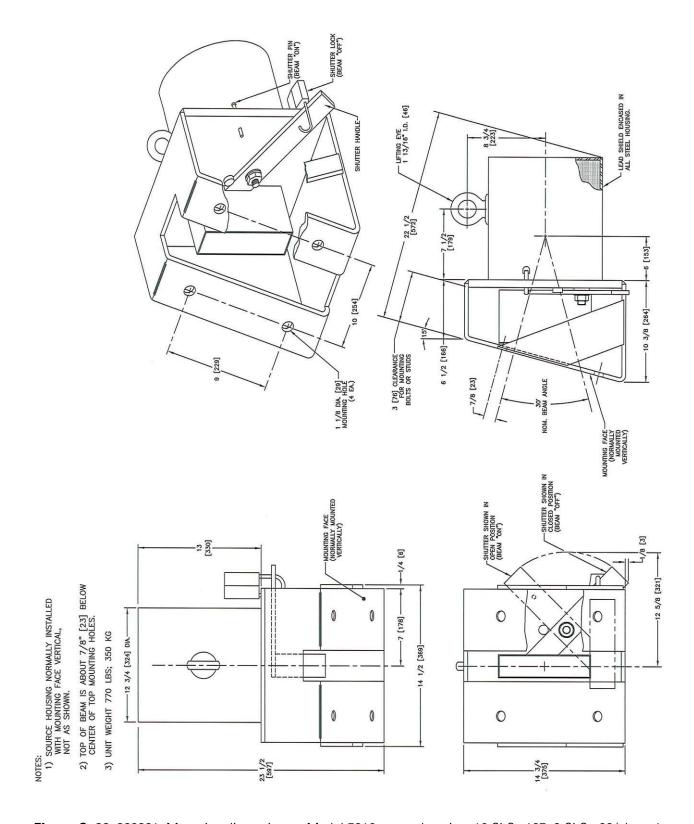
866891: Mounting dimensions — Model 5210 source housing, 10 Ci Cs-137, 3 Ci Co-60 (sheet 1 of 1)
